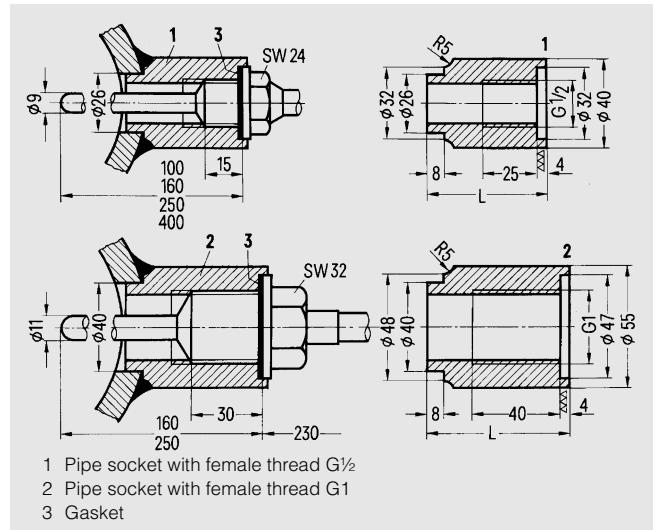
/6 Screw-in protective tubes, mounted; at top for low-pressure, with screw socket G1/2; at bottom for high-pressure, with screw socket G1
